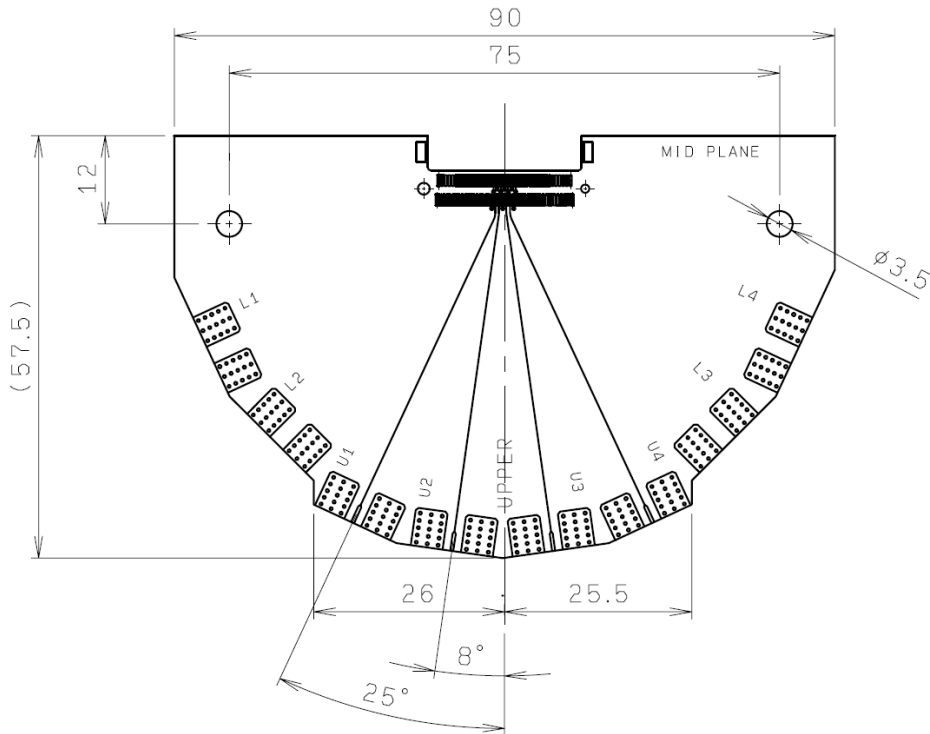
Mid-mount ~~Mother Board~~Motherboard Test Fixture PCB
